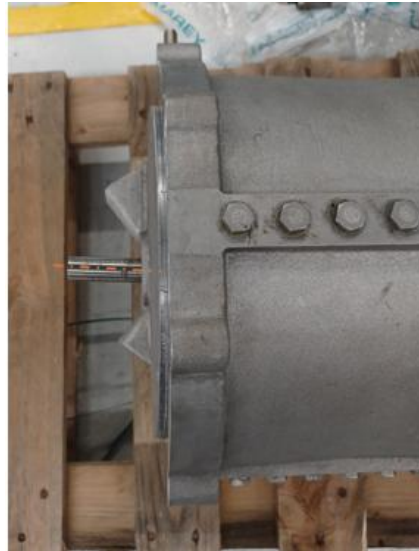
Detail of the motor (front-top view) and final part of the bent shaft after testing activities
